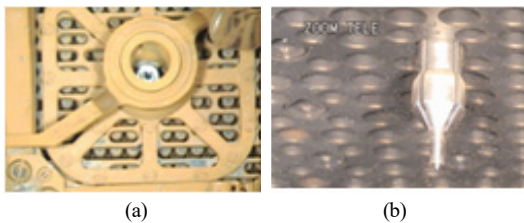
Fuel Assembly Tie Rod (a) Top Nozzle, (b) Bottom Nozzle
